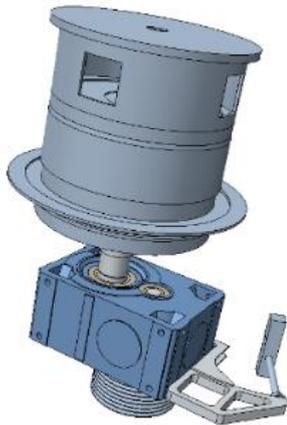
Gearbox System (gearbox, belt support, pulleys and drum).
